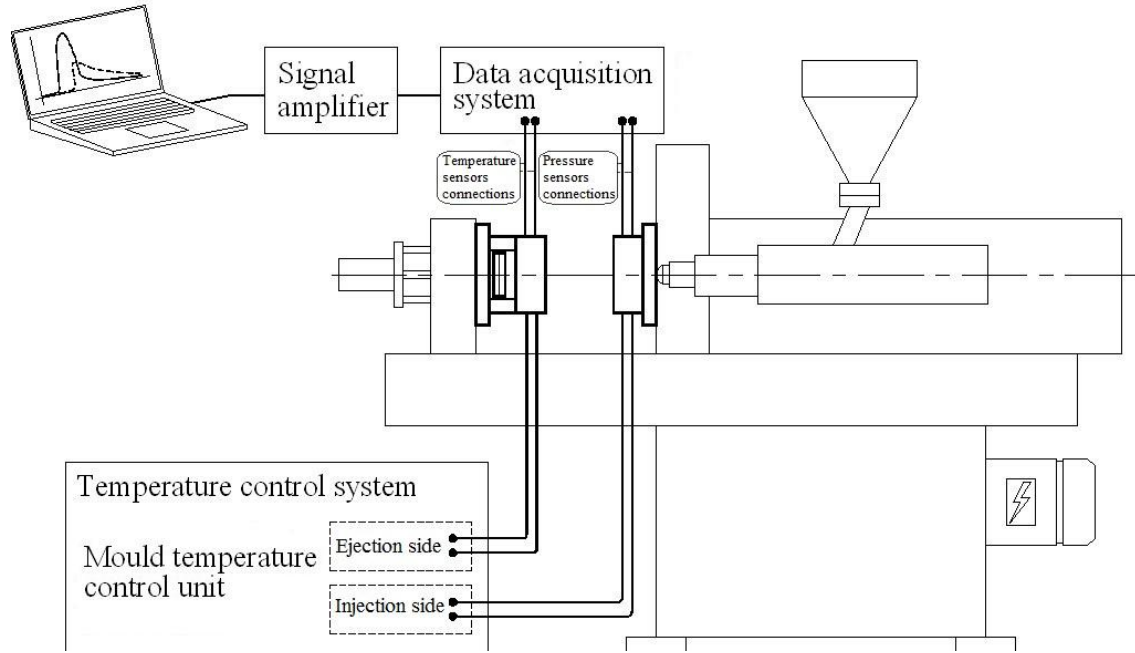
Layout of the injection moulding machine, mould and auxiliary equipment
